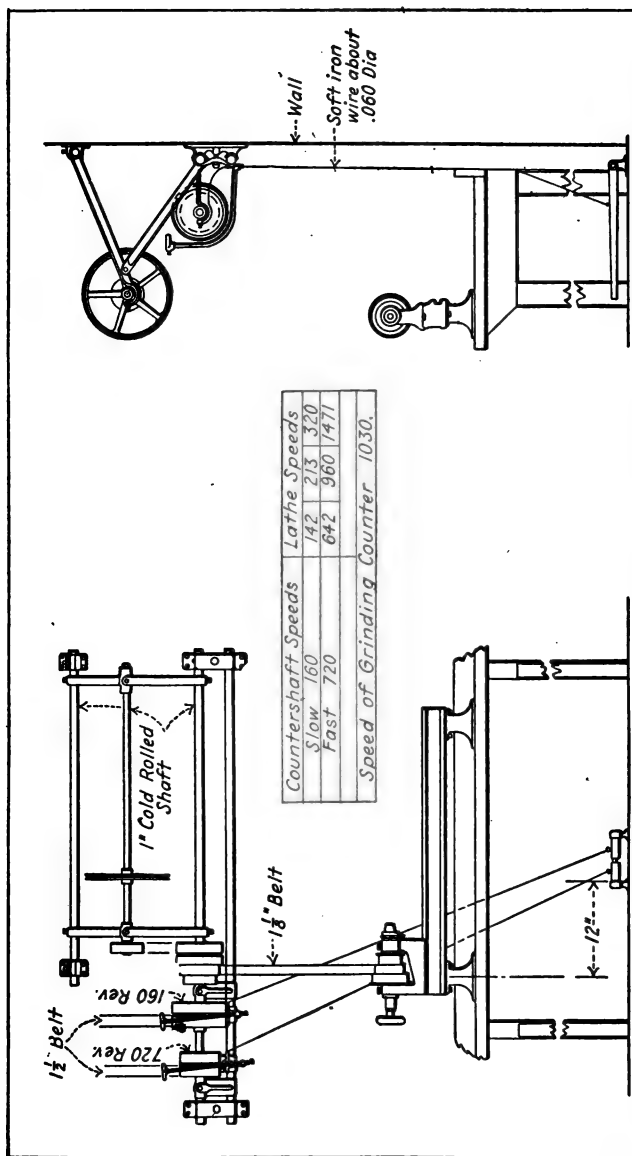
How a small precision lathe is set up with a second countershaft to drive the grinding attachment.
